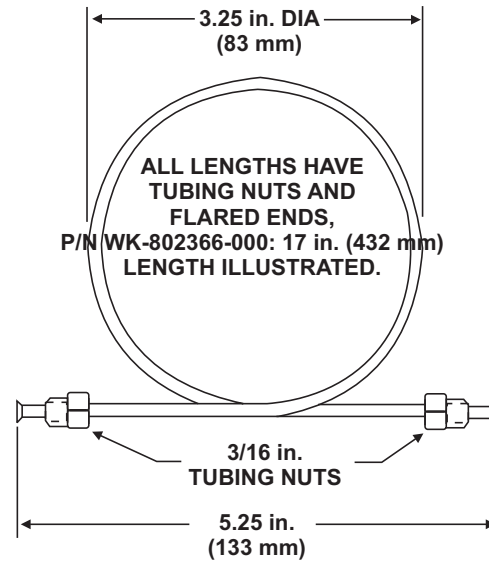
Pneumatic Detection System Tubing, 3/16 in.
